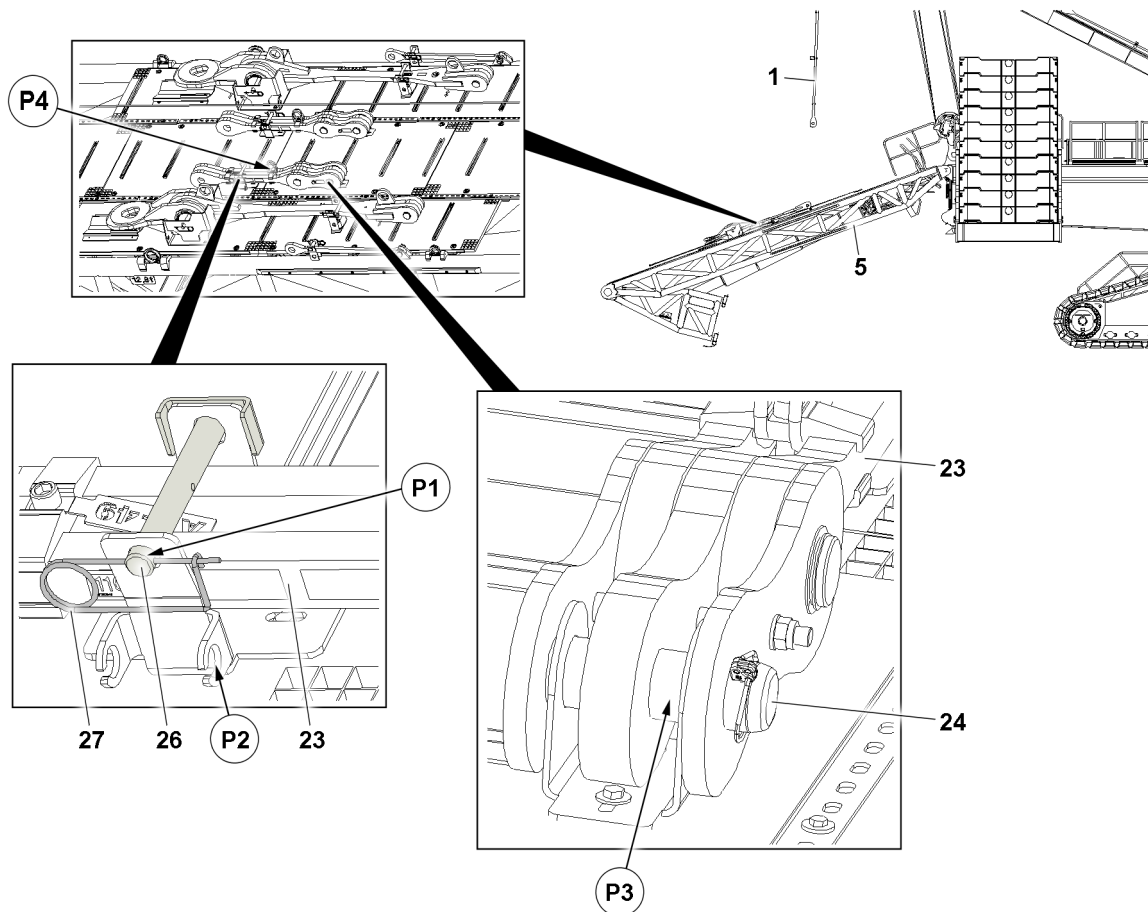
Pinning the D-guy rods in the assembly position on the "V-frame" pivot section – Releasing the guy rods
